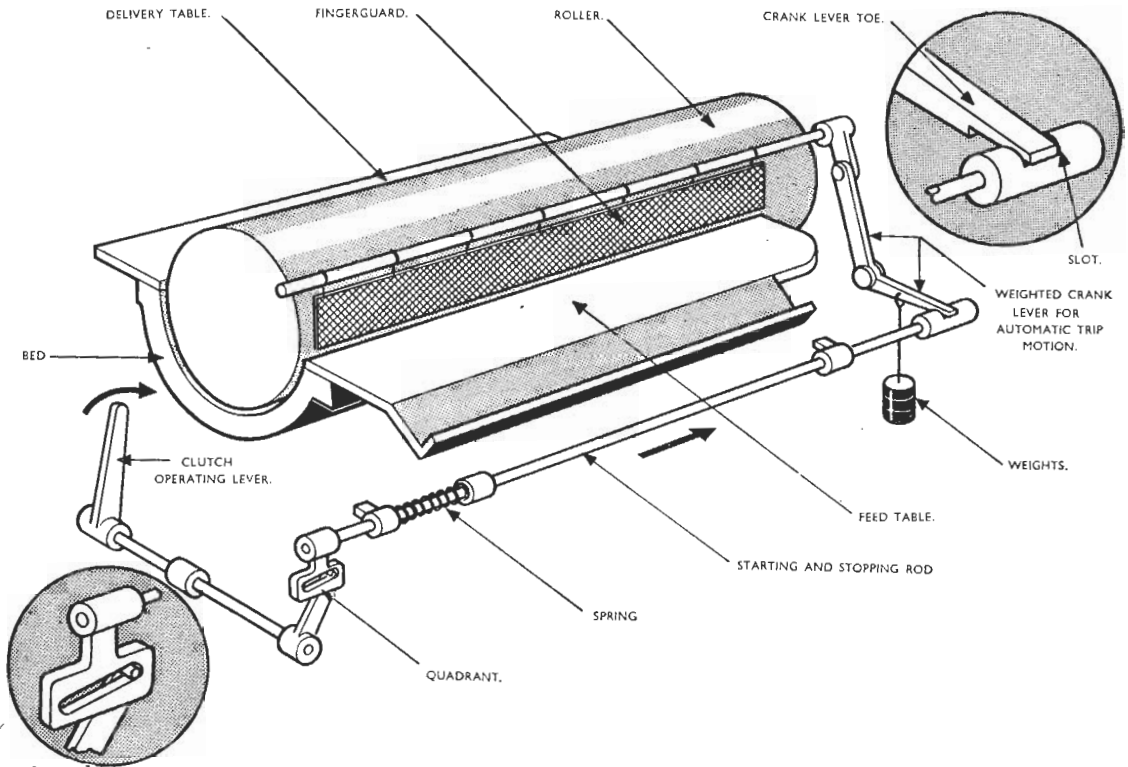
Fingerguard device for 90 × 18-in. flatwork ironing machine.
